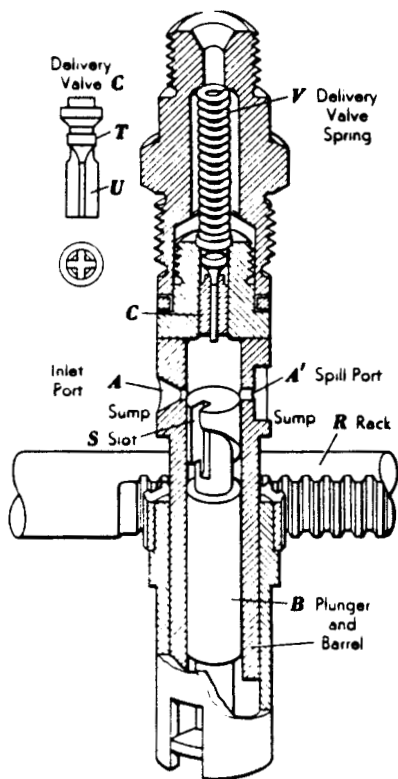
Section View of Bosch Pump Elements. (Courtesy American Bosch Corp.)
